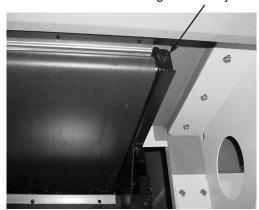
Underside View of Feed Table and Infeed Conveyor
